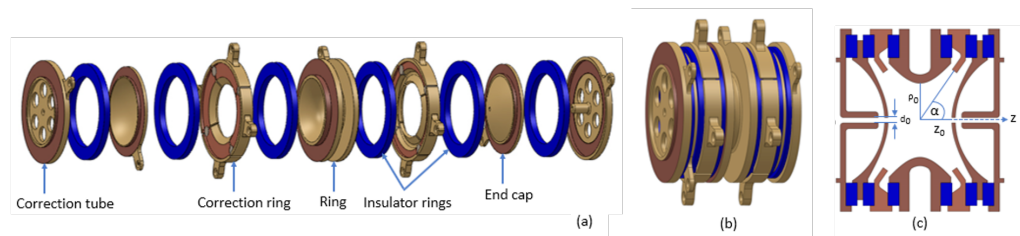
Schematic drawing of a measurement trap: (a) exploded view—copper colored components are the electrodes, blue components are insulators, and brown components are insulated support rods; (b) assembled view; (c) cross-sectional outline with labeled dimensions.
